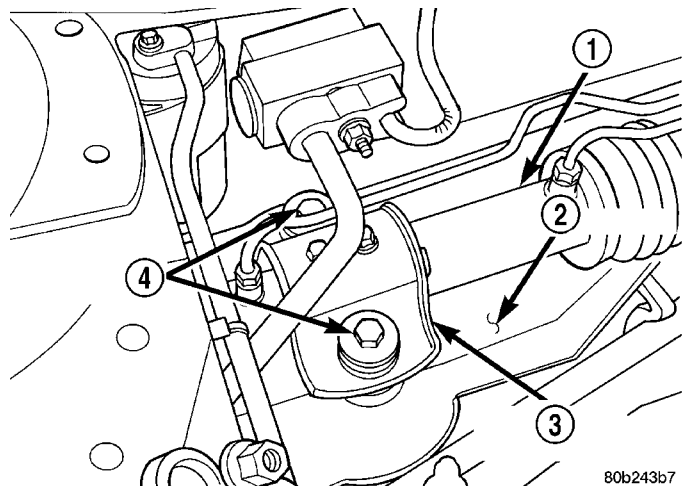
Steering Gear Attachment To Crossmember (Right Side)
